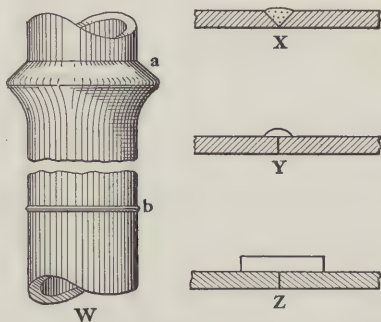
COPPER-BIT AND OTHER SOLDER JOINTS
